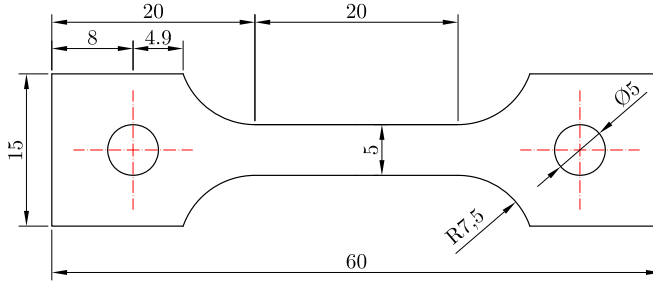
Dimensions in mm of the AA5754-H111 plane tensile specimens. Nominal thickness is 1 mm.
